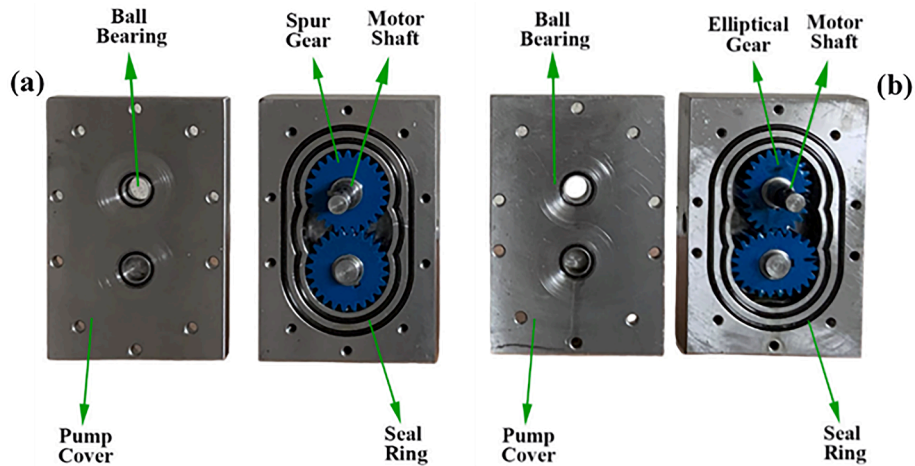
(a) Hydraulic pump with cylindrical spur gear pair (b) Hydraulic pump with elliptical gear pair after manufacturing and assembly.
